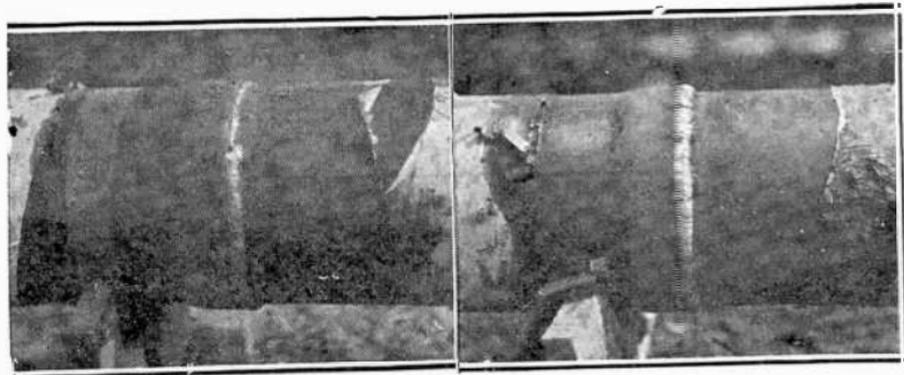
,172.—Pipe line joint showing portions of burning in weld and finish weld in a plain bell and spigot joint. Photographed on Texas Empire 600 mile line.
